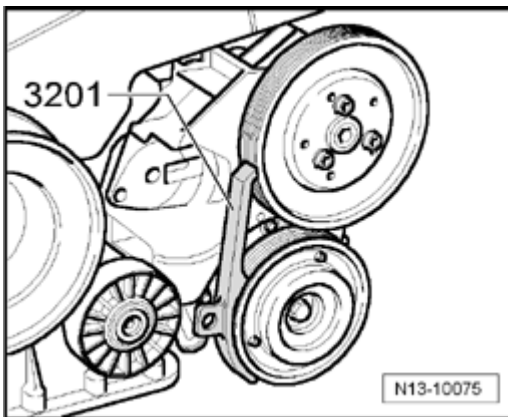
Alignment Gauge 3201 Set Onto Belt Pulley Of Air Conditioning Compressor
